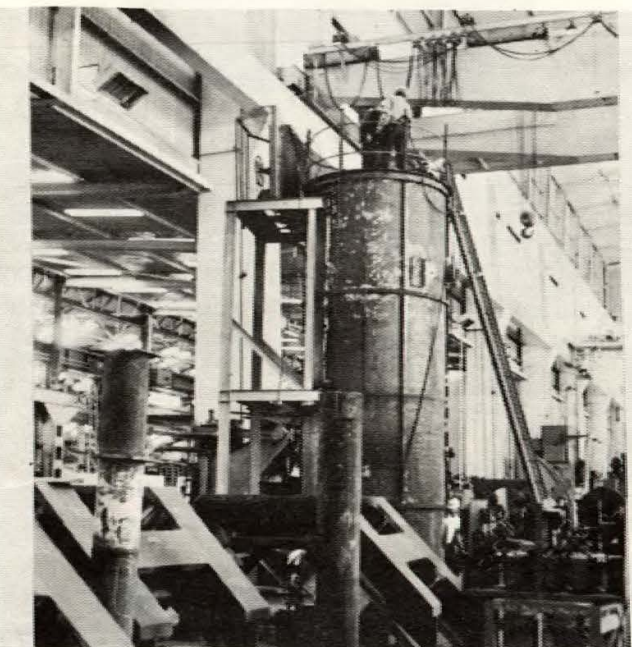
Re-assembling the (35) 2" bent tubes is Charles Hall. Tommy Platt is close by seeing that the tubes get assembled in the matching holes.
